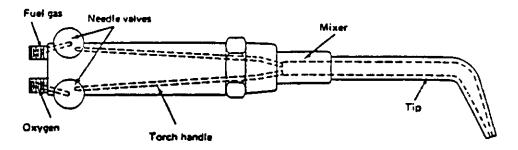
(b): ELEMENTS OF AN OXY-FUEL GAS WELDING TORCH
